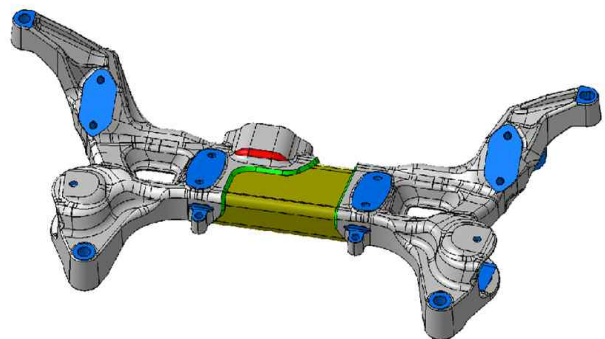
CAD model of a passenger car front aluminum sub-frame
